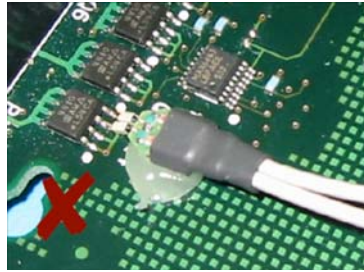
Incorrect Securing Method Because Glue is Placed on the Probe Head Tip
